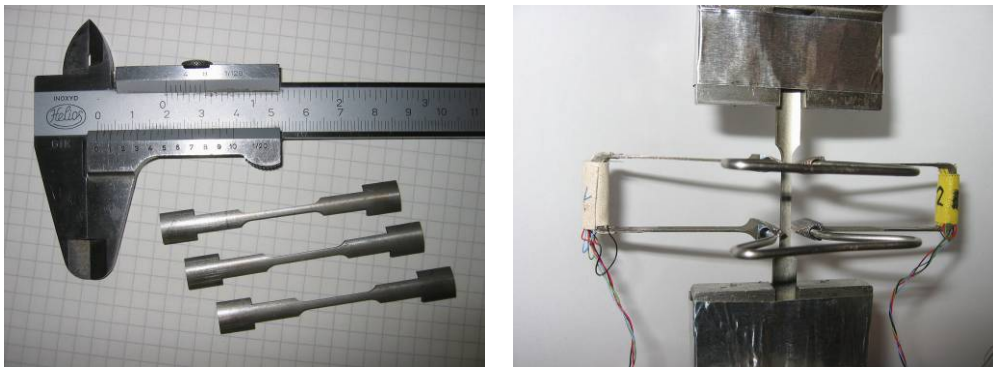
Machined flat specimens for tensile testing and mounted sample for test.
